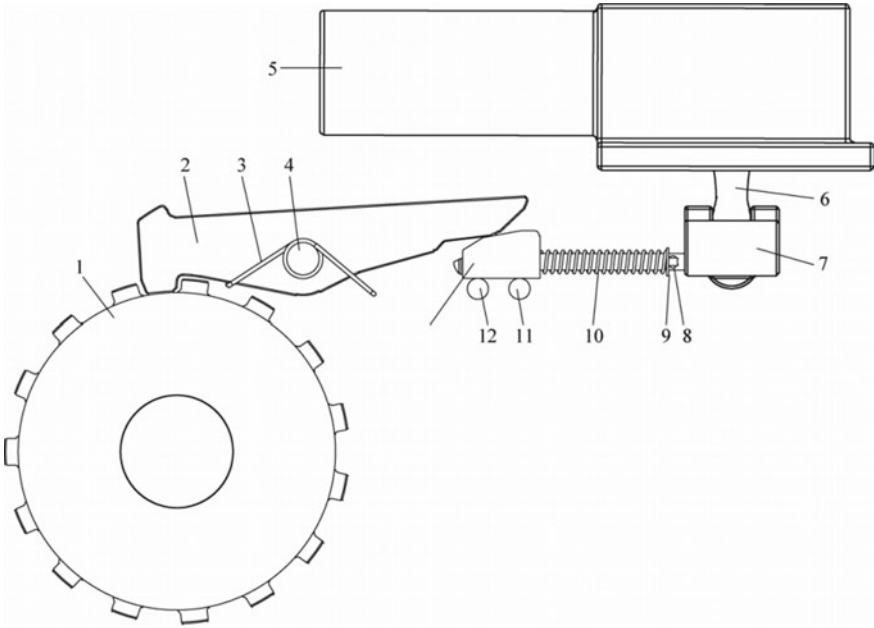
Electric parking mechanism. 1—Ratchet, 2—pawl, 3—torsion spring, 4—pawl rotating shaft, 5—actuator motor, 6—motor fork, 7—Concave block, 8—push rod, 9—compression spring washer, 10—compression spring, 11—guide column, 12—trapezoidal
